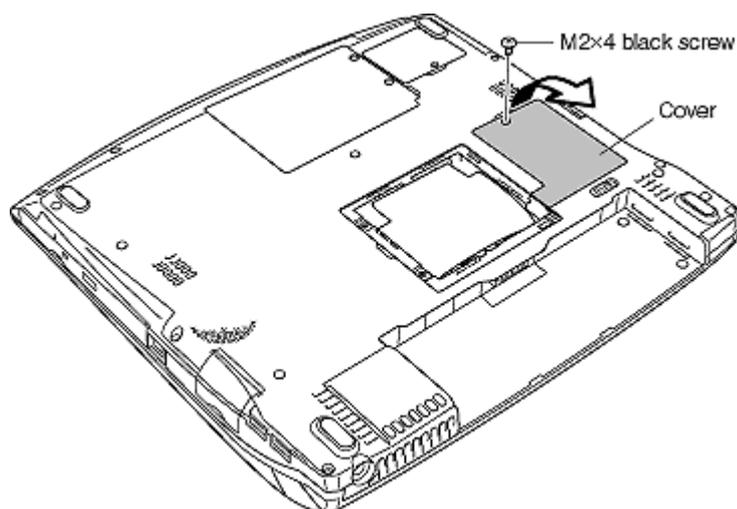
Removing the wireless LAN Mini PCI card slot cover
